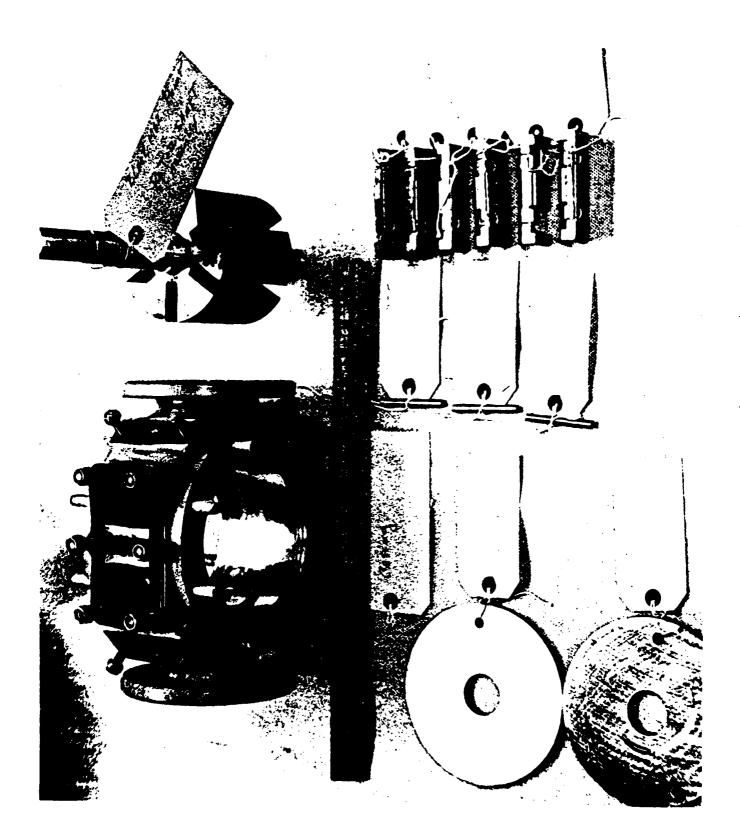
BLACKMER PUMP PARTS (3-1)
